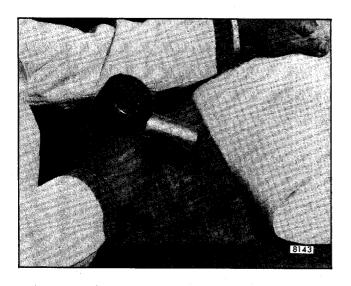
Separating Wrinkled Area from Roof Panel - Heat Application
